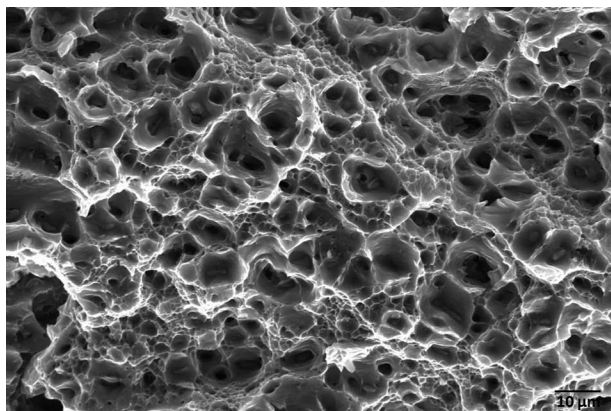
Another region of the fracture surface shown in Fig. 183 taken at high magnification
